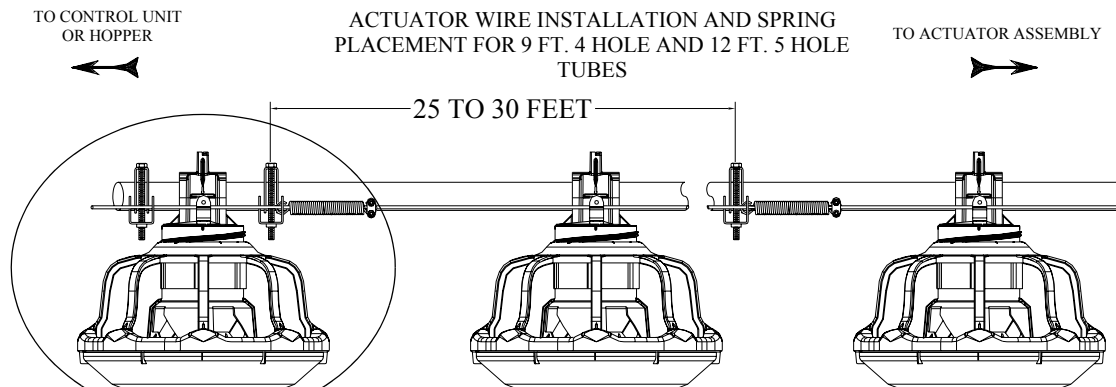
Wire layout for 9 ft. 4 hole and 12 ft. 5 hole
